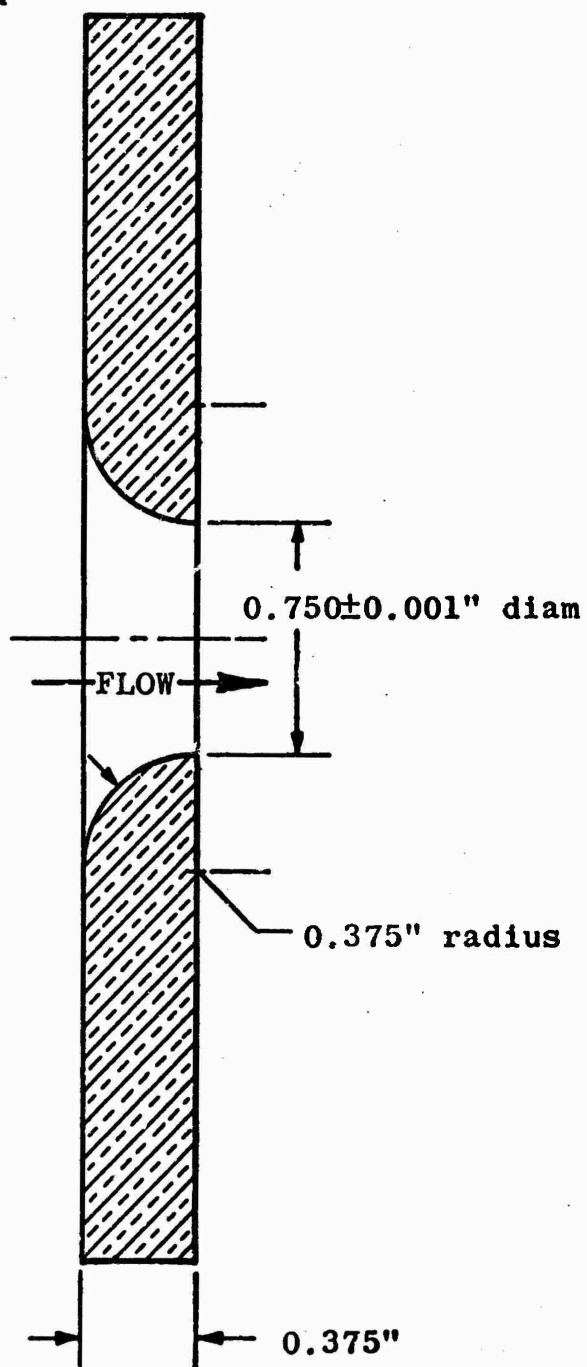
0.750 INCH DIAMETER SMOOTH APPROACH NOZZLE.
